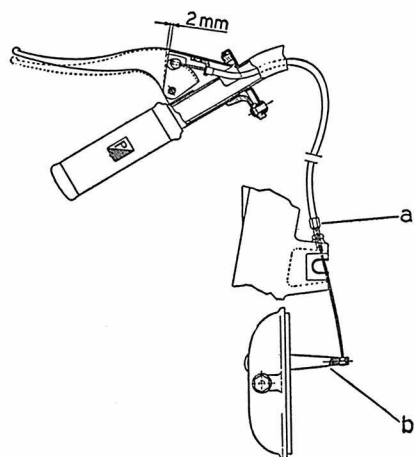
Clutch control on handlebars should have 2 MM (0.078 in.) free travel before moving lever (b).
